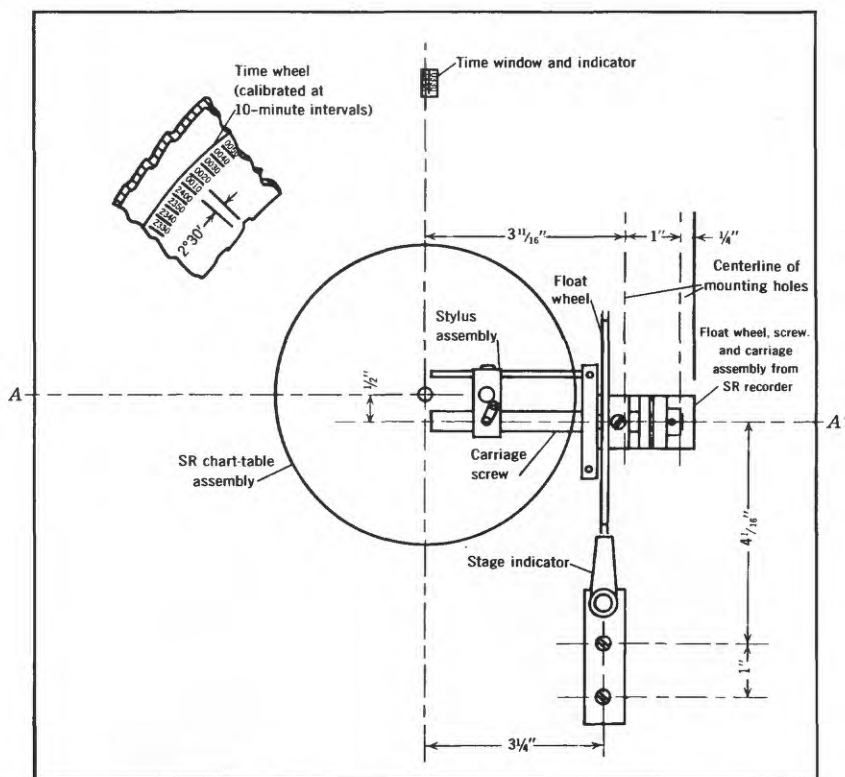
Top view of polar coordinate chart reader showing stylus assembly, carriage screw, and float wheel of stage-reading mechanism and cutaway view of time wheel. A-A' is line of section shown in figure 3.
